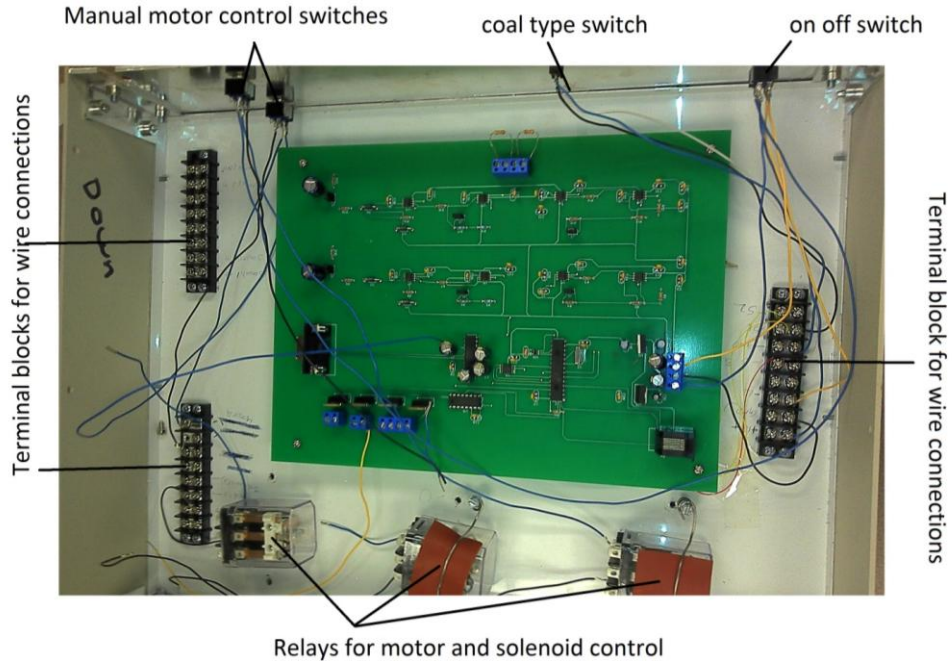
Sensor circuit PCB and switches housed in metal enclosure.
